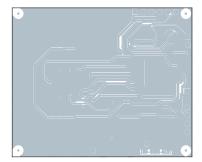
SKY73212-11 Evaluation Board Assembly Drawing
